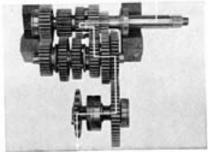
E 4th gear (M₂-M₃ gear shifted)
